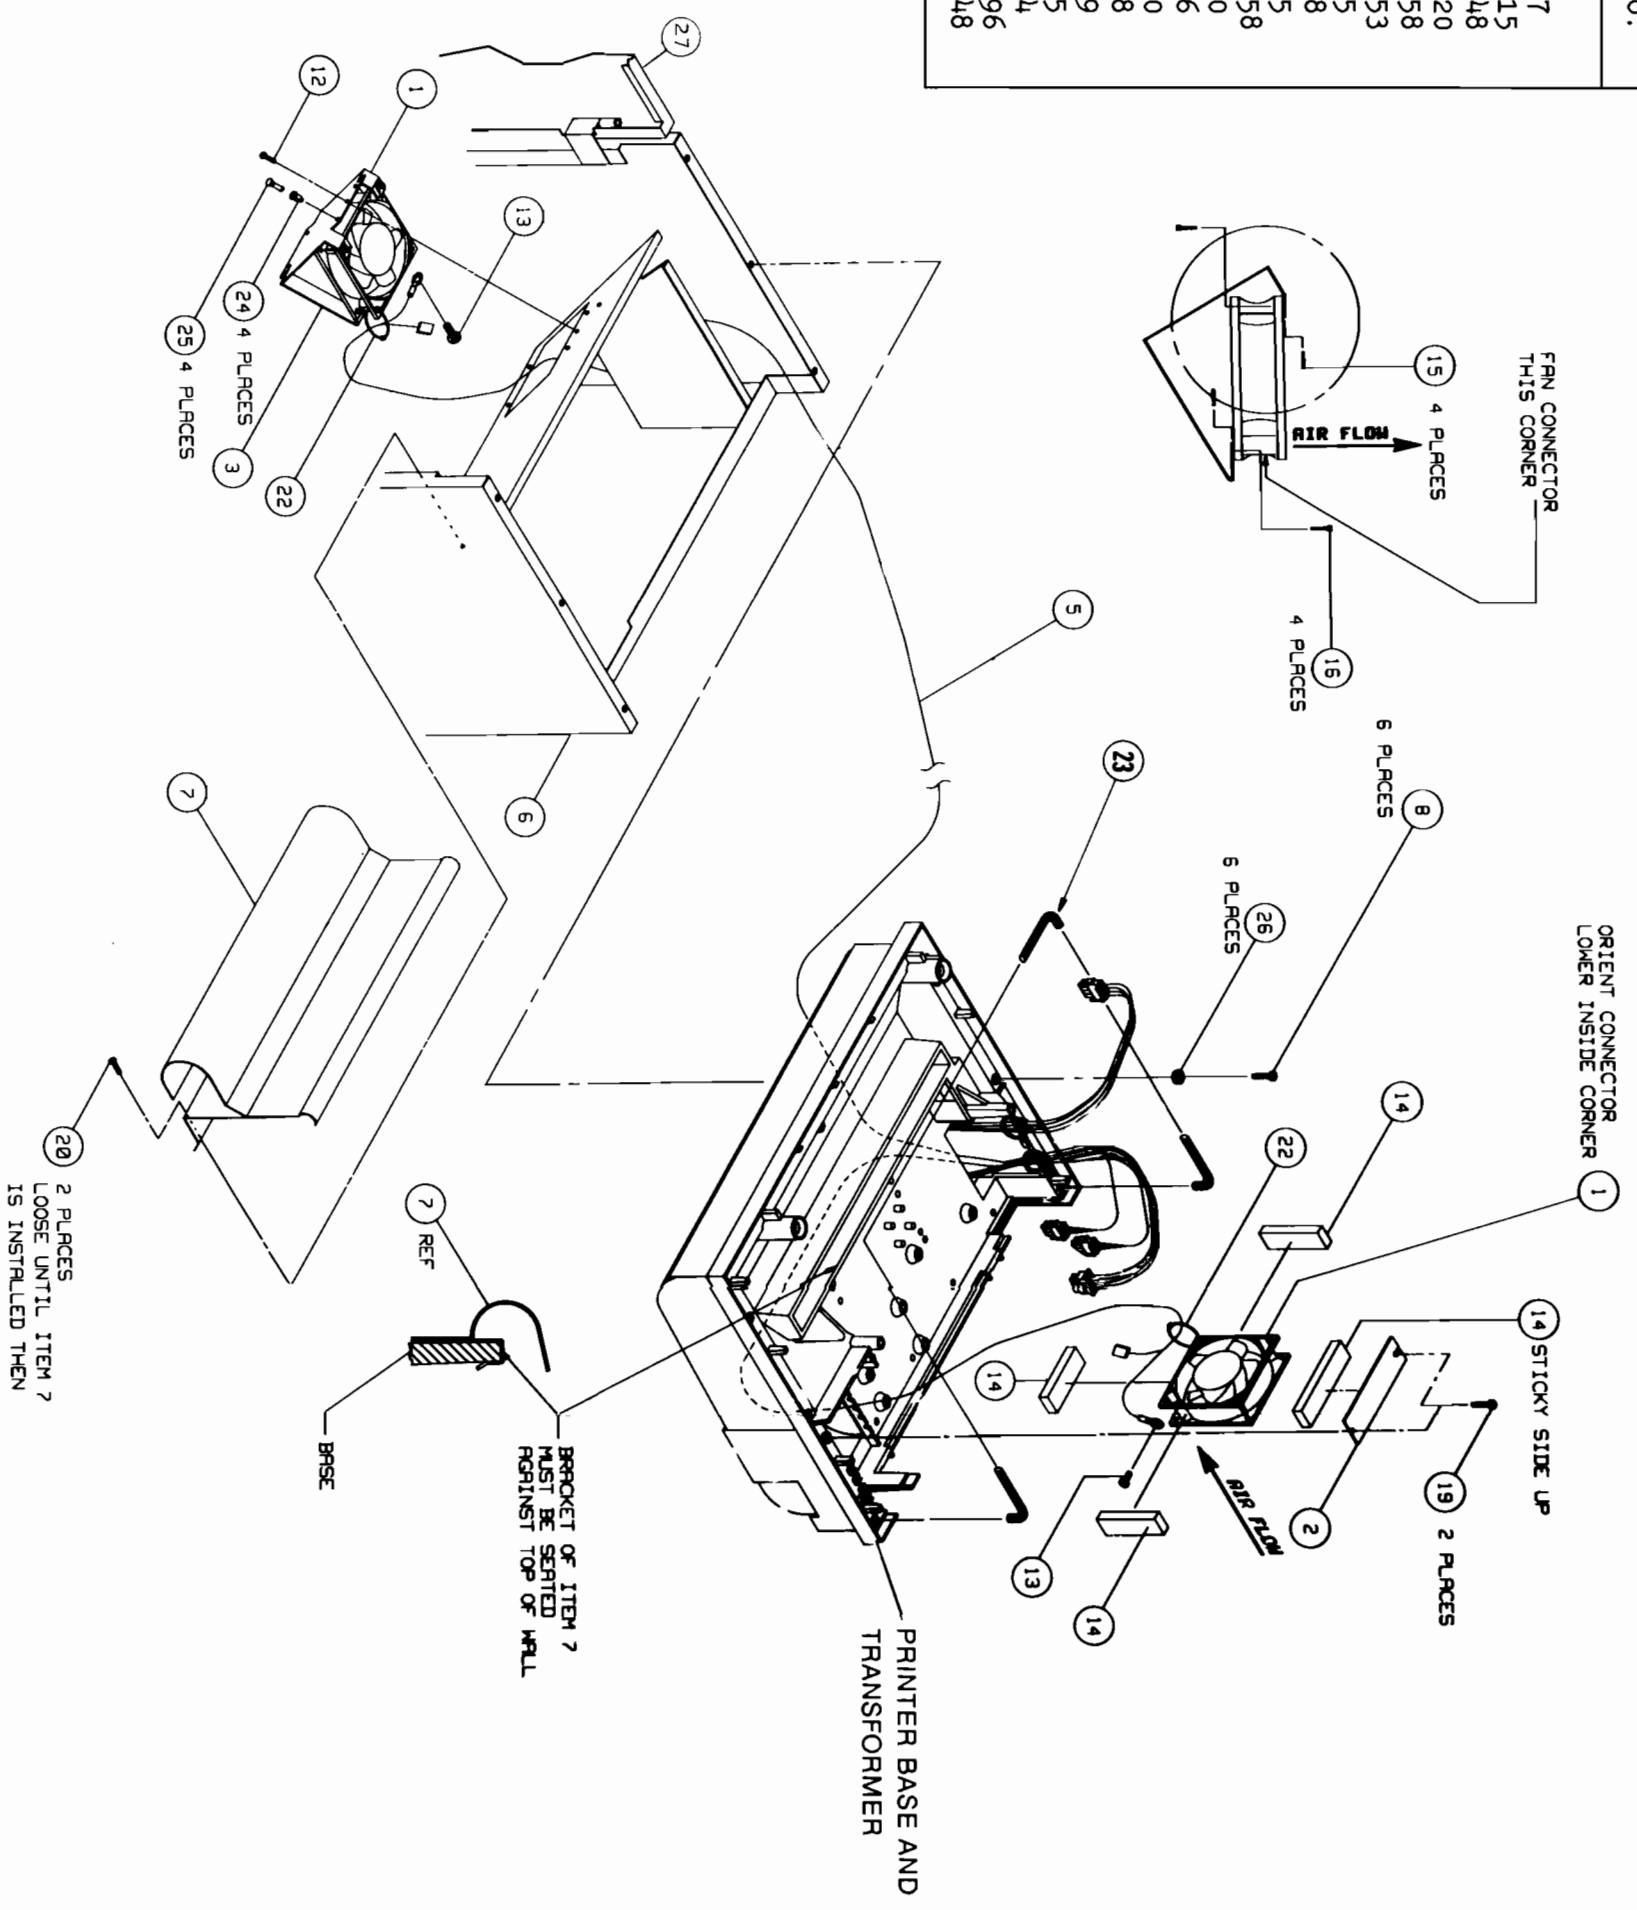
STAND AND PRINTER BASE ASSEMBLIES
